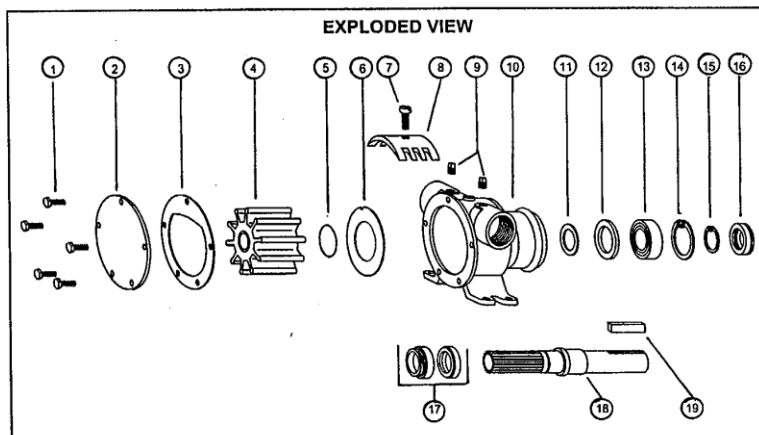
FLEXIBLE IMPELLER DETAILS (*Jabsco*)
